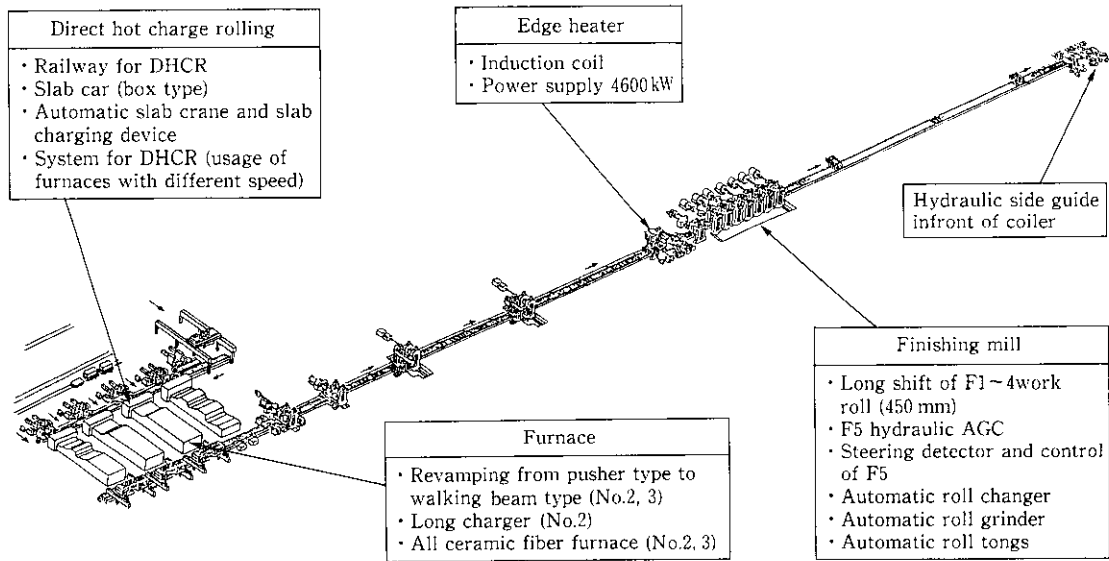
Outline of recently modified equipments in No. 2 hot strip mill
